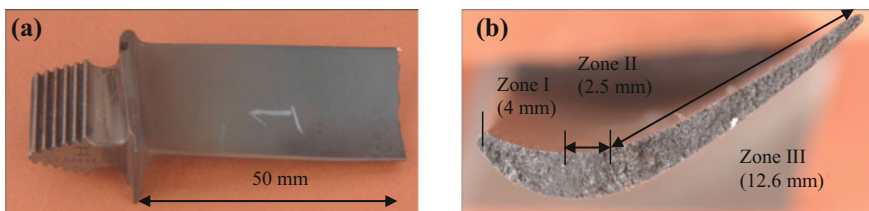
a Fractured LPTR blade, b fracture surface showing three zones of crack propagation
